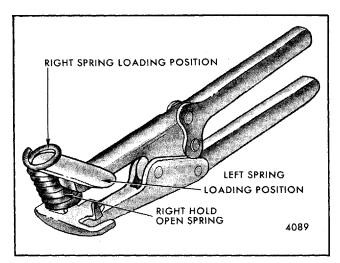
Hold-Open Spring, Loading Positions Using Tool J-23497 or Equivalent - X Styles
